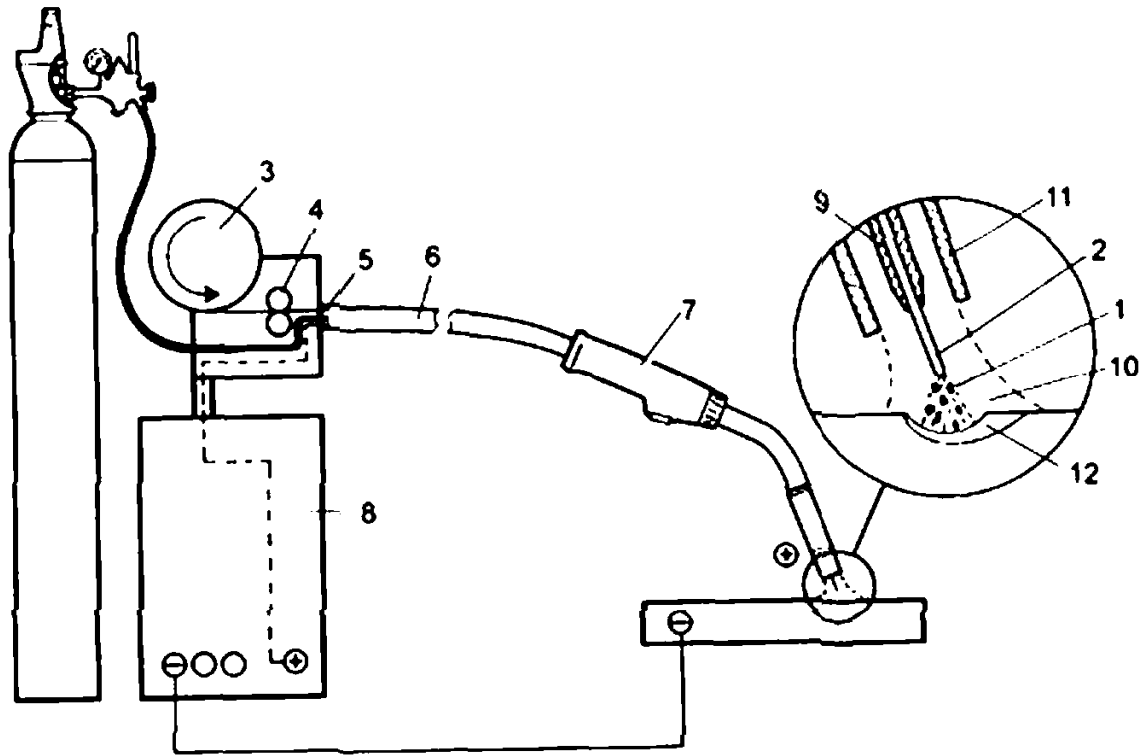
A general schematic for the setup of a GMAW system. The diagram shows 1) welding arc 2) consumable electrode 3) electrode reel 4) wire feed rollers 5) gas shielding and power supply connection 6) wire feed/shielding gas guiding tube 7) GMAW torch and trigger 8) power supply 9) contact tip 10) shielding gas flow 11) nozzle 12) molten welding pool. (taken from [13]).
